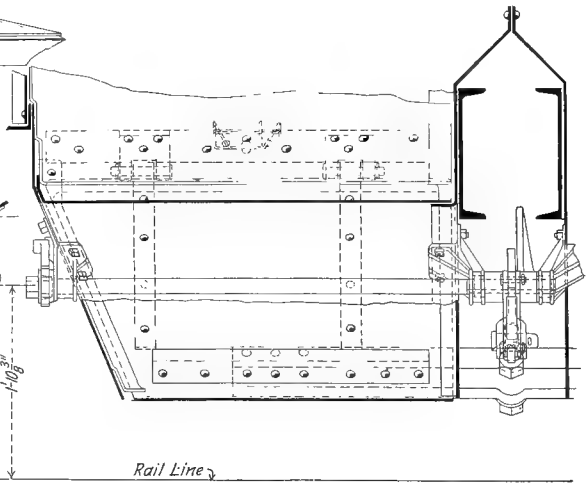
Simonton Door Operating Apparatus for Self-Clearing Hopper Car. Standard Steel Car Company.
